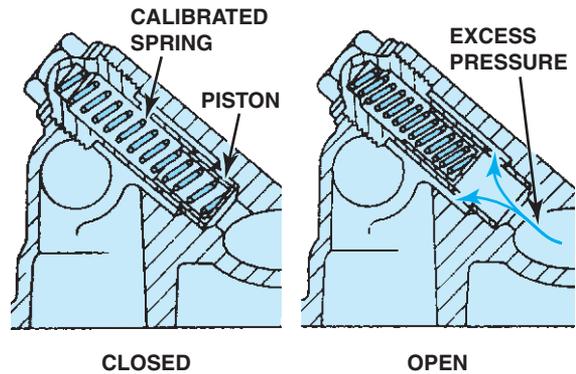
Oil pressure relief valves are spring loaded. The stronger the spring tension, the higher the oil pressure.
